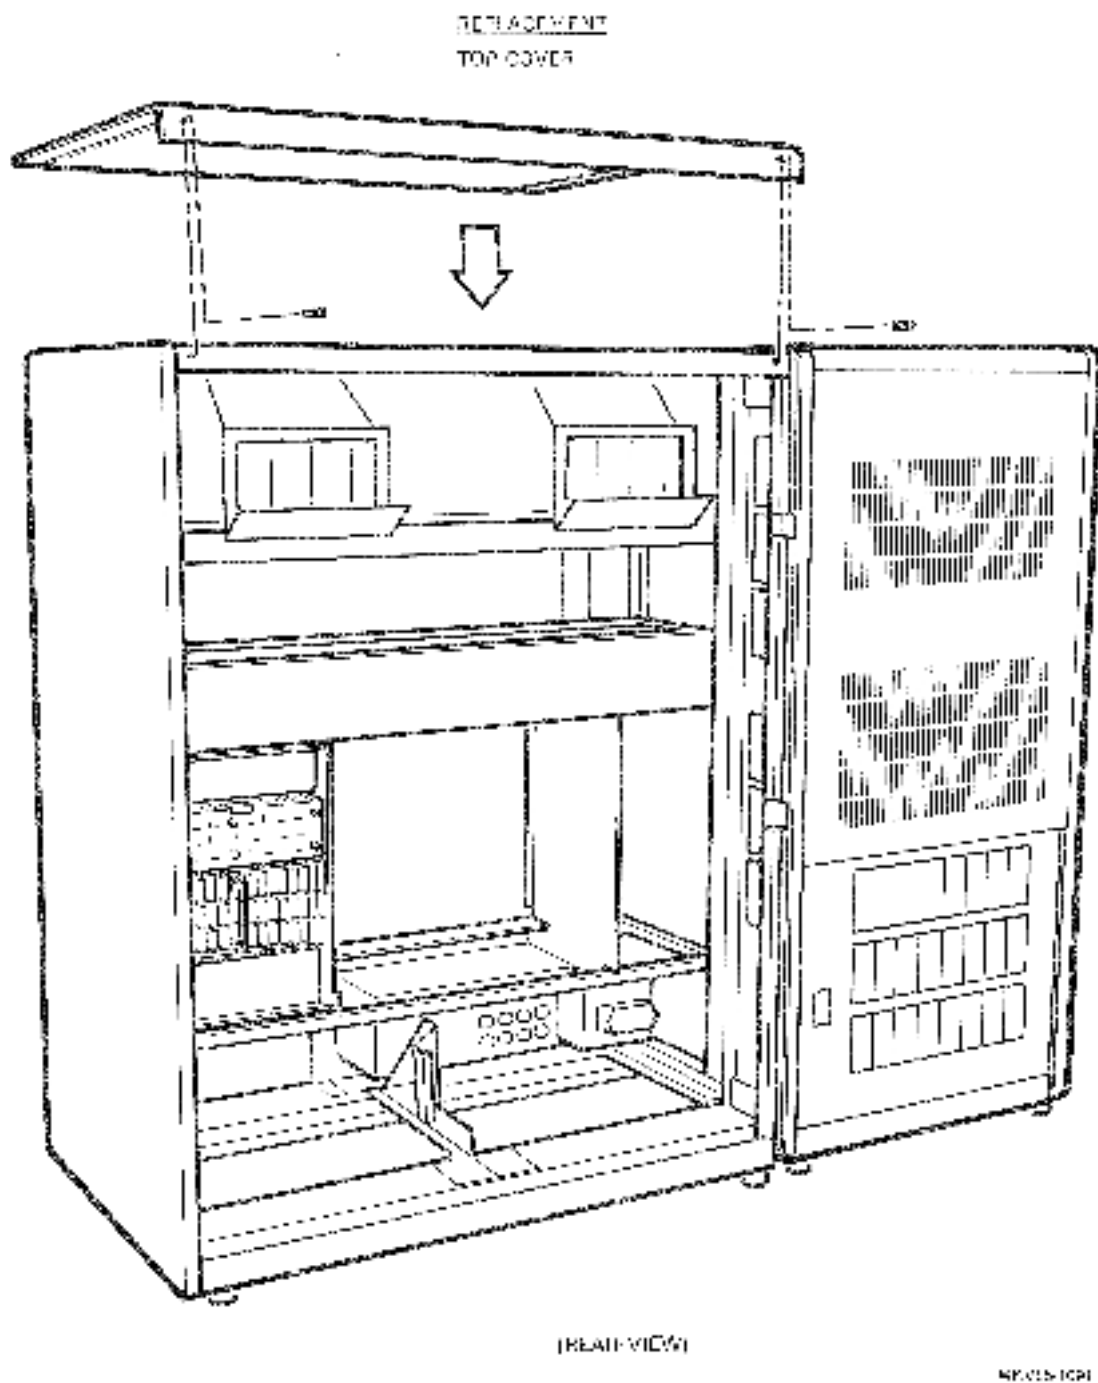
CPU and Front-End Cabinet Mating (Sheet 7 of 9)
